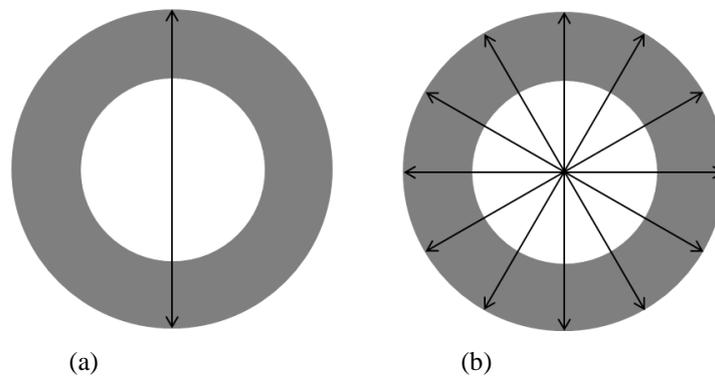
Out diameter equipment's (a) Example of Zumbach measurements (b) Example of IMS OD Machine measurements
